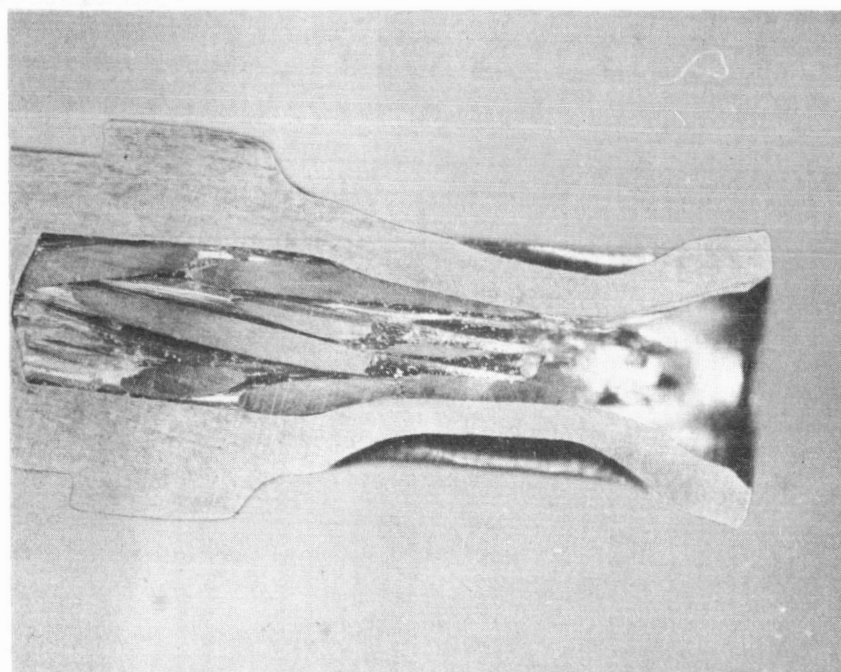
CESO-16-SO43-16 Section View of Crimped Contact After Tensile Test
